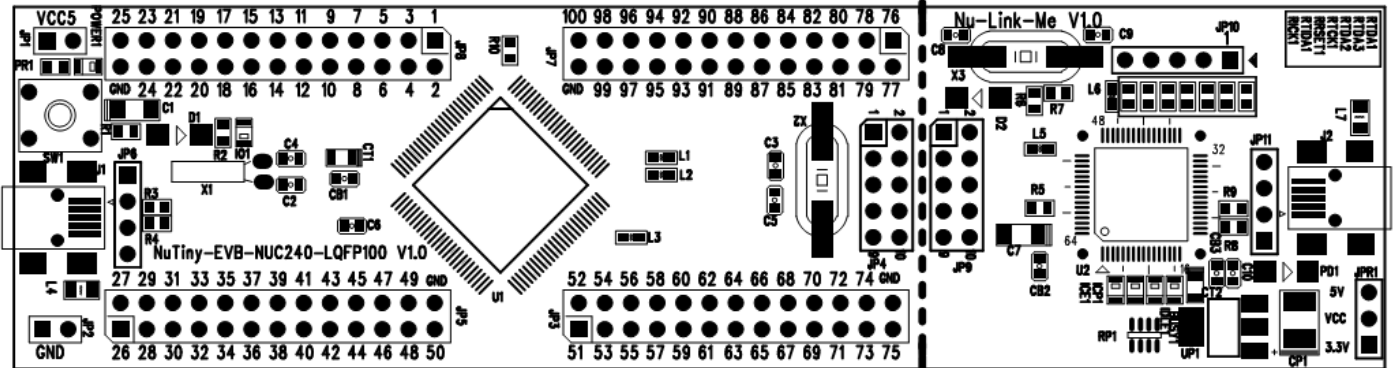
NuTiny-SDK-NUC240 PCB Placement
